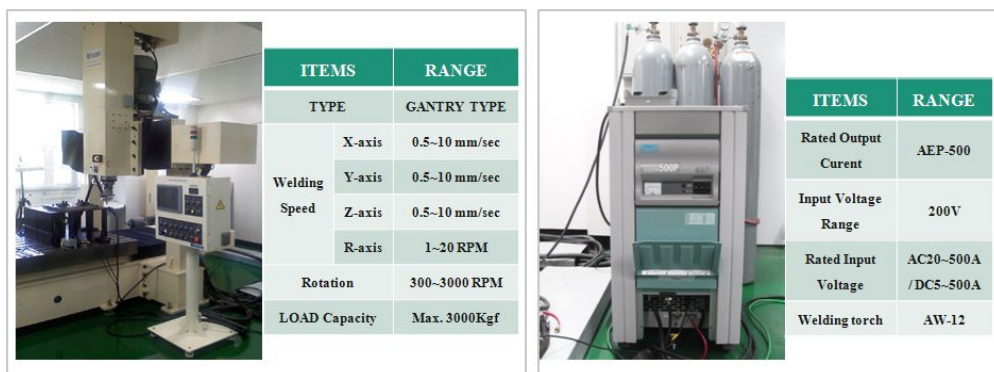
FSW and TIG Welding equipment details
